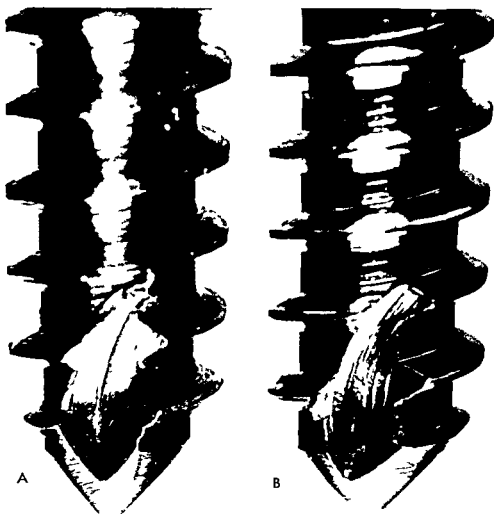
The enlarged photographs of two screw ends show typical burrs left after machining (A) The tip of the self tapping flute ends in a wave of deformed metal (B) The place where the flute crosses the last thread shows a large turned down metal burr. Only occasionally do these burrs escape the eye of the inspector. They are however a very possible source of corrosion as the metal is grossly worked and deformed
